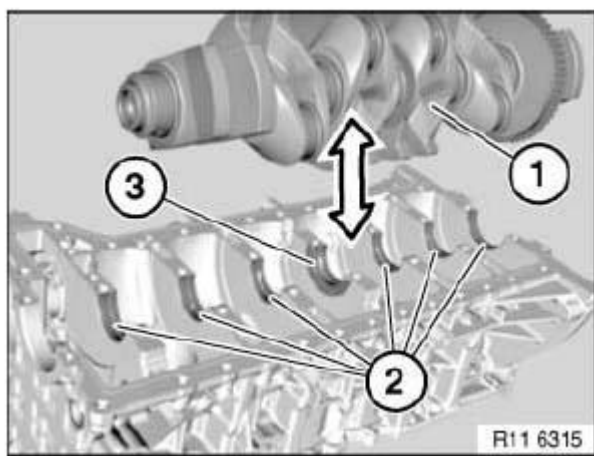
Identifying Main Bearing Shells And Crankshaft
